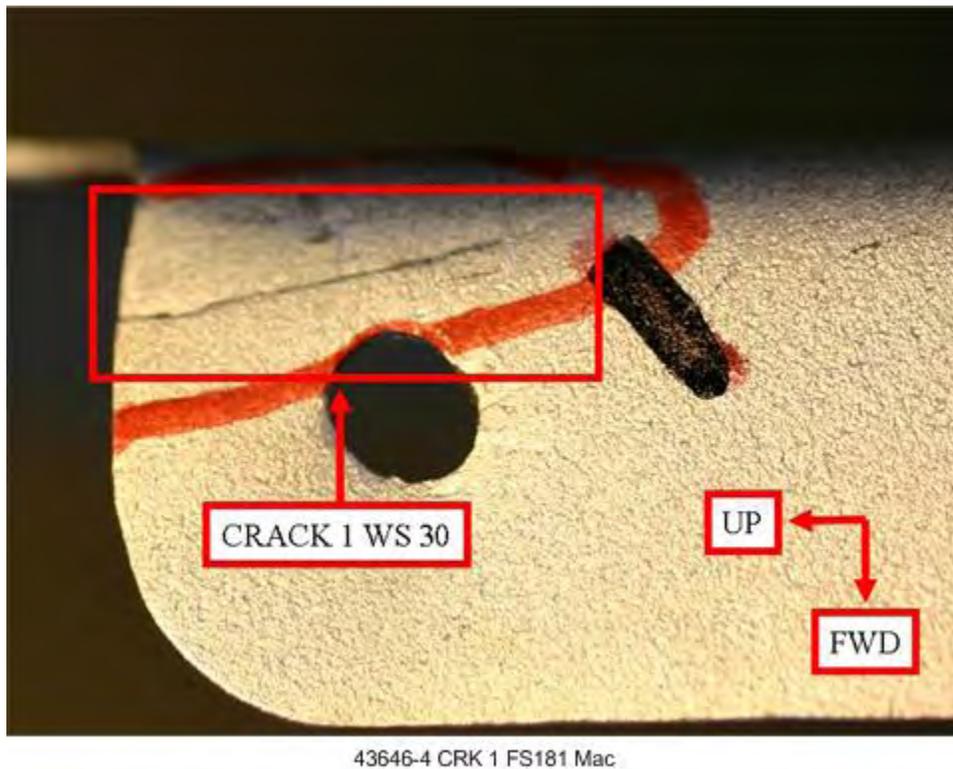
Macroscopic View of Crack 1 on the Left Wing Bulkhead Wing Fillet WS 30 FS 181
